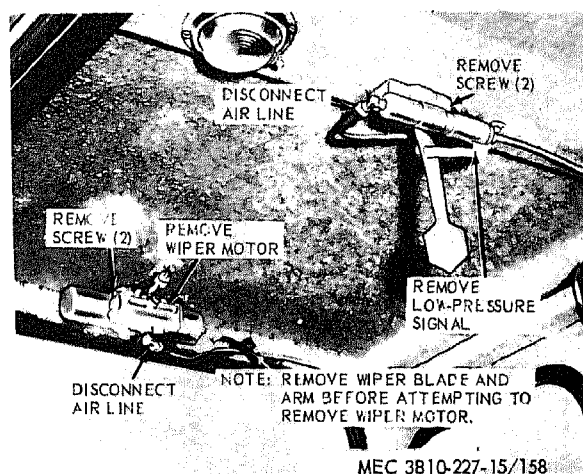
Windshield wiper motor and low-pressure signal, removal and installation.
